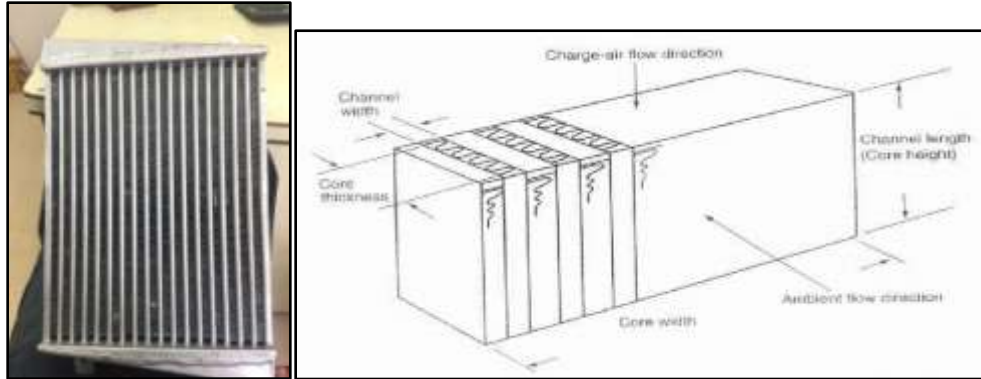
Manufactured component and Nomenclature of air-to-air cooler
